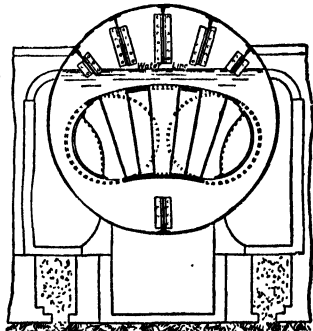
Galloway Boiler: Section beyond the Bridge.
